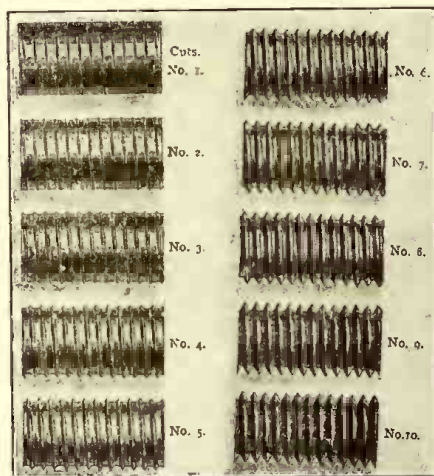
Successive "Cuts" Necessary to Machine a Good Thread in the Lathe, Either External or Internal.
